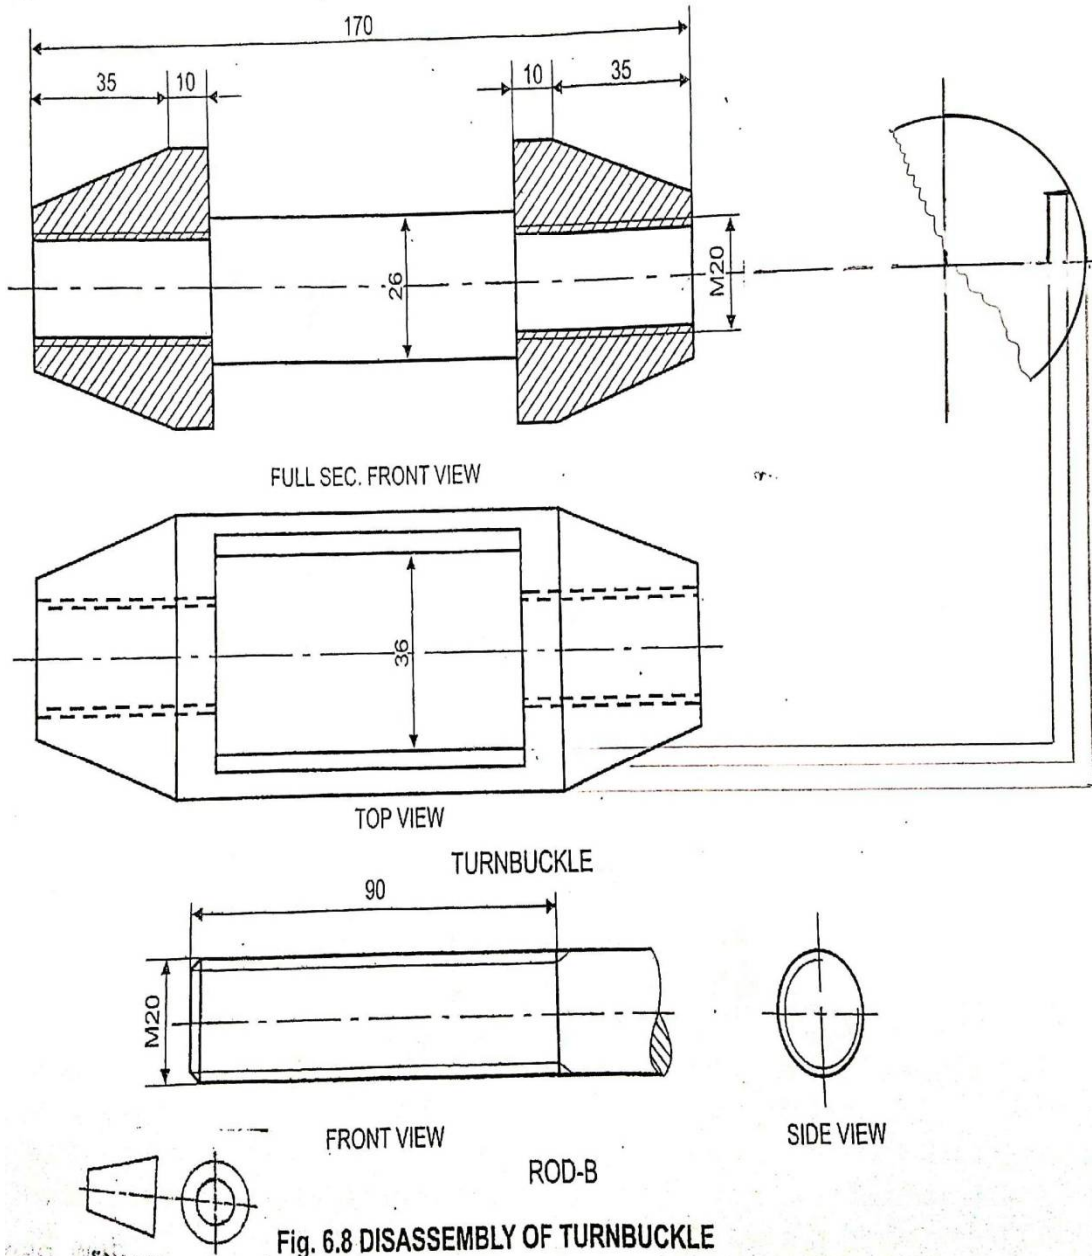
DISASSEMBLY OF TURNBUCKLE
